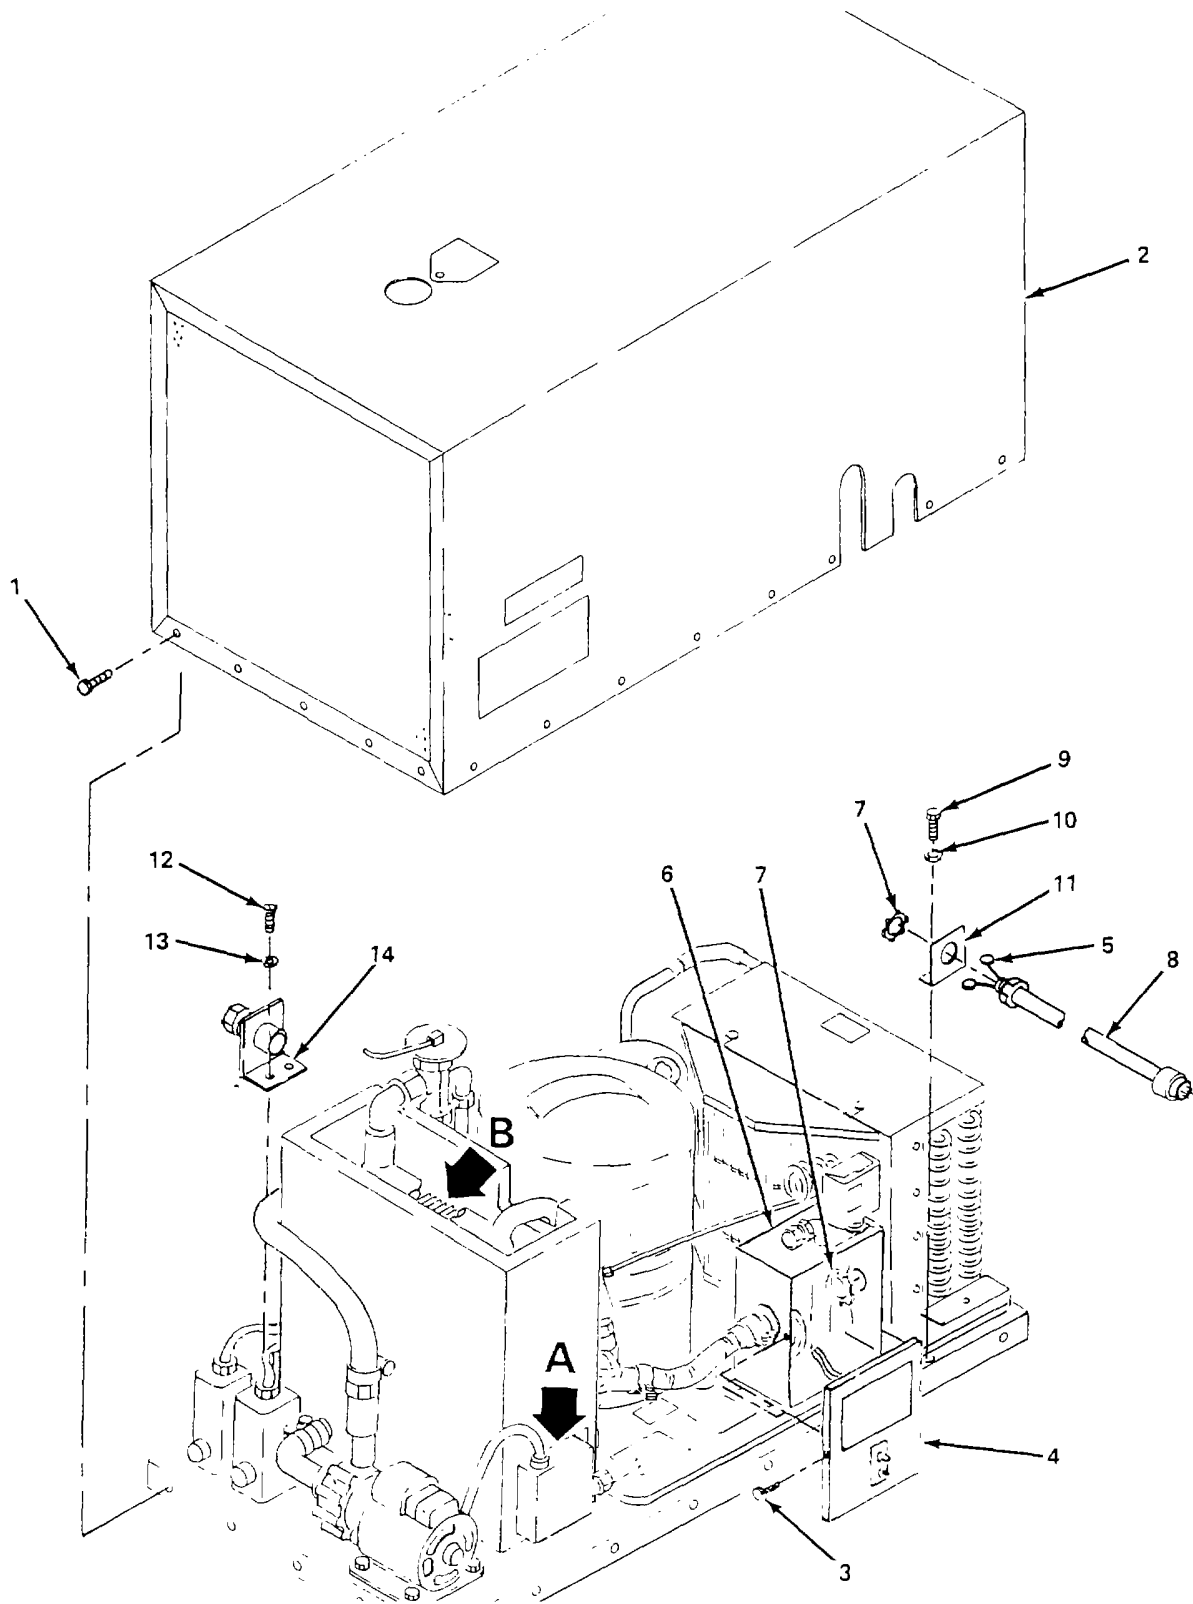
Heater/Chiller Module, Repair (Sheet 1 of 3).
